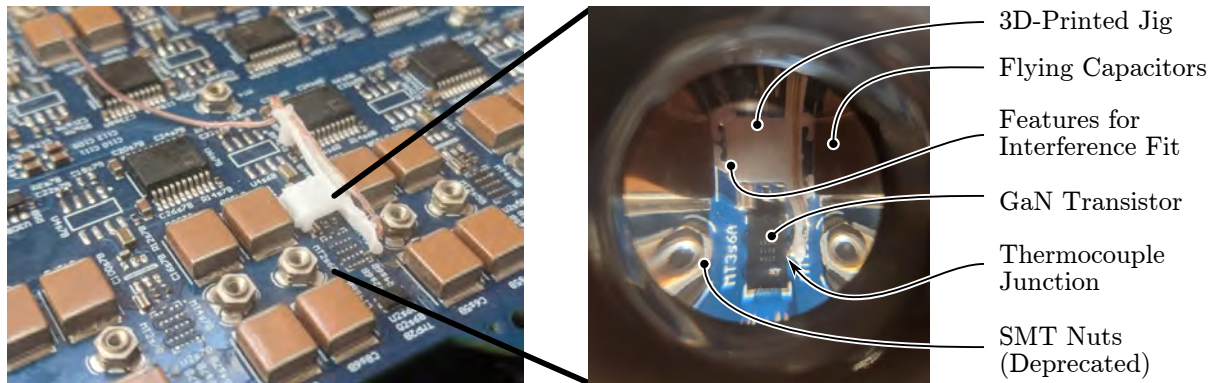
Miniature thermocouple jig that enable consistent fixturing for chip-scale GaN devices.
